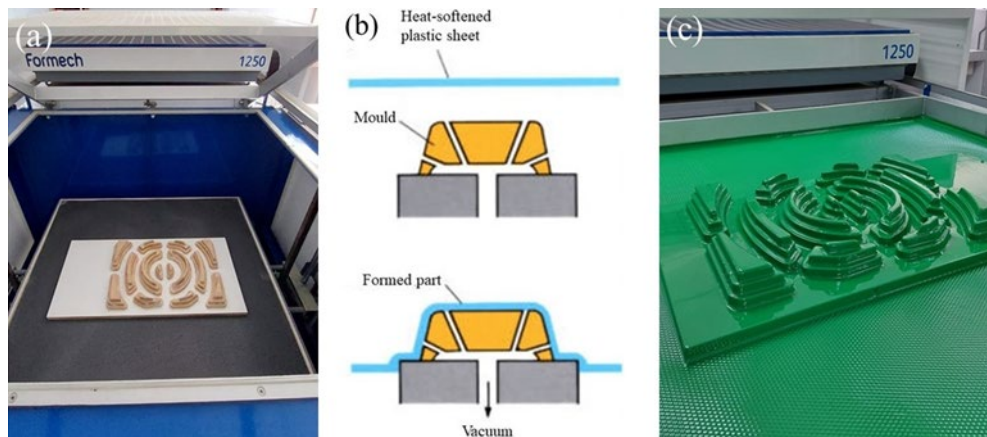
(a) Wooden designs from CNC drilling used as the master mould (Source: Author’s own work), (b) Image describing vacuum forming process (Source: The Open University, 2017), and (c) vacuum formed mould using Plastic HIPS (Source: Authors)
